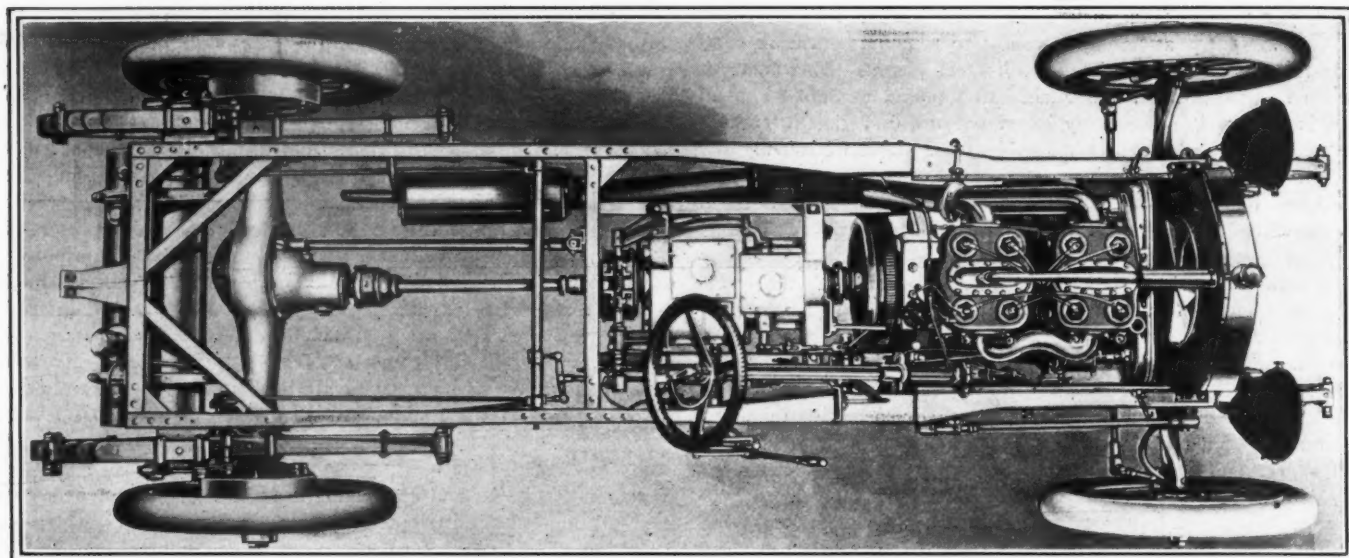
Plan view of the Mercer chassis, showing the method of housing the gearset and clutch in one casting and the arrangement of the drive and torque members. The mounting of the cranking motor and the electric generator may also be noted in this view
